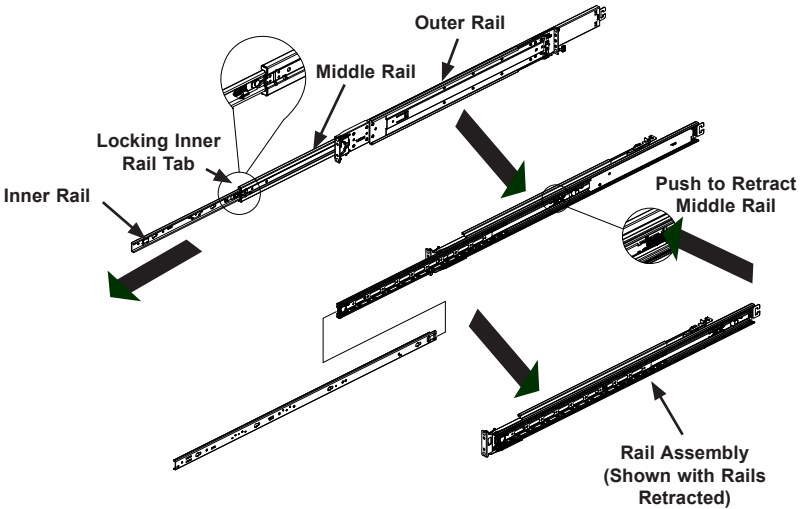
Identifying the Outer Rail, Middle Rail and Inner Rails (Left Rail Assembly Shown)
